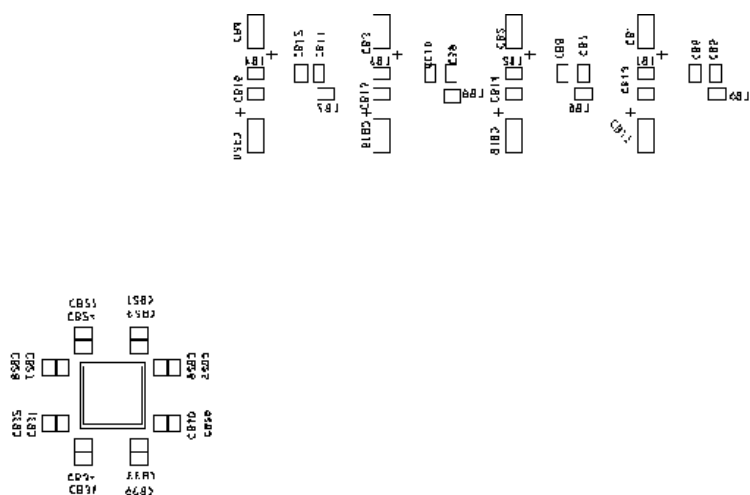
CYP15G0401DXB Eval Board Bottom Silk Layer Layout
